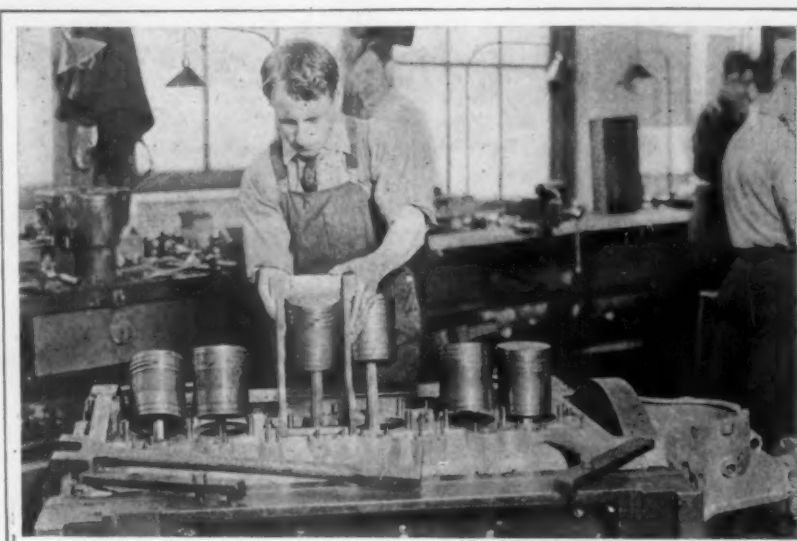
The Alignment of Each Piston Is Adjusted During the Process of Motor Assembly by Gauge in the Manner Indicated
